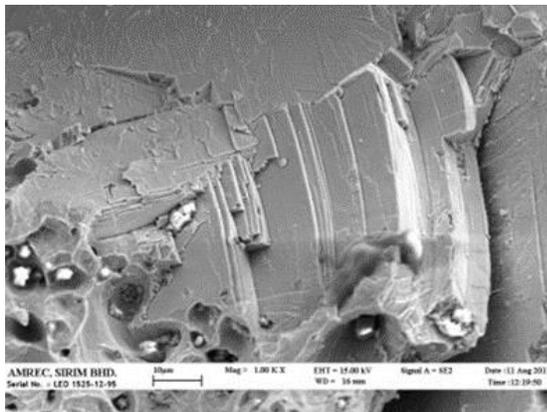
Fracture surface before failure with intergranular fracture
